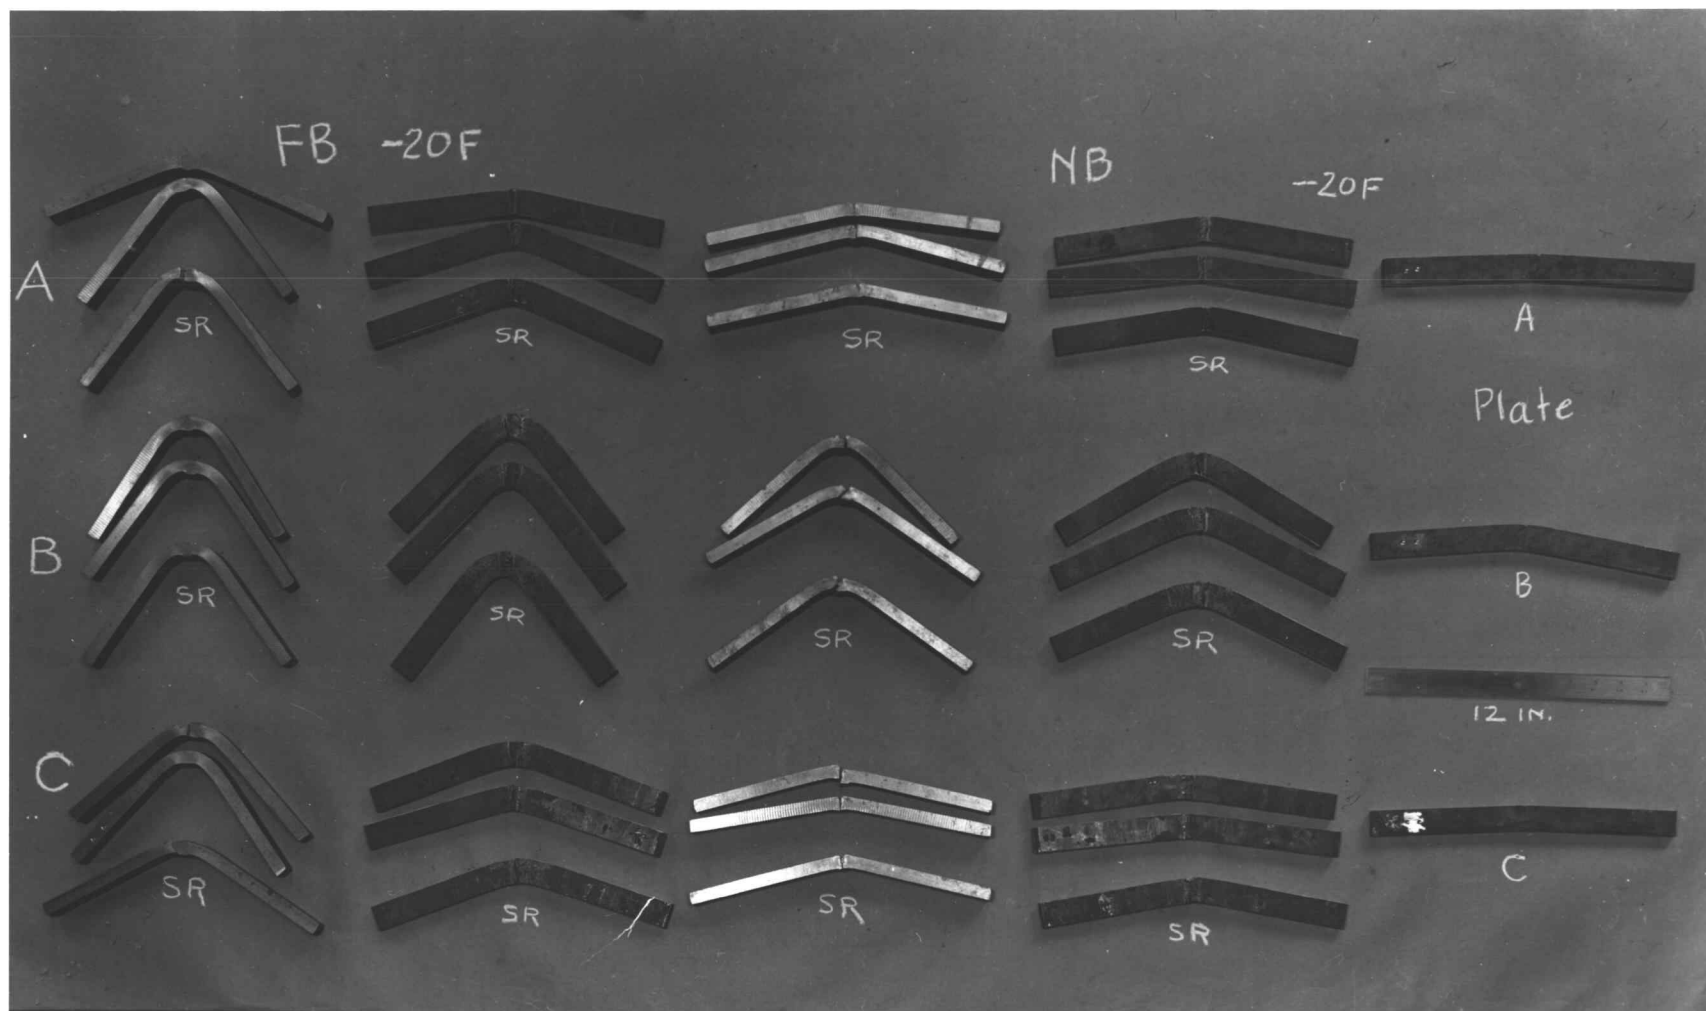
Notched and Free Bend Specimens After Fracture at -20 F
